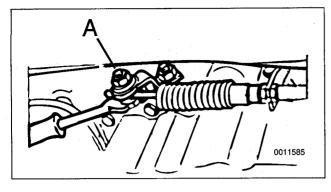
Selector lever cable clamping nut (A). Counterhold clamping bolt when loosening nut.
